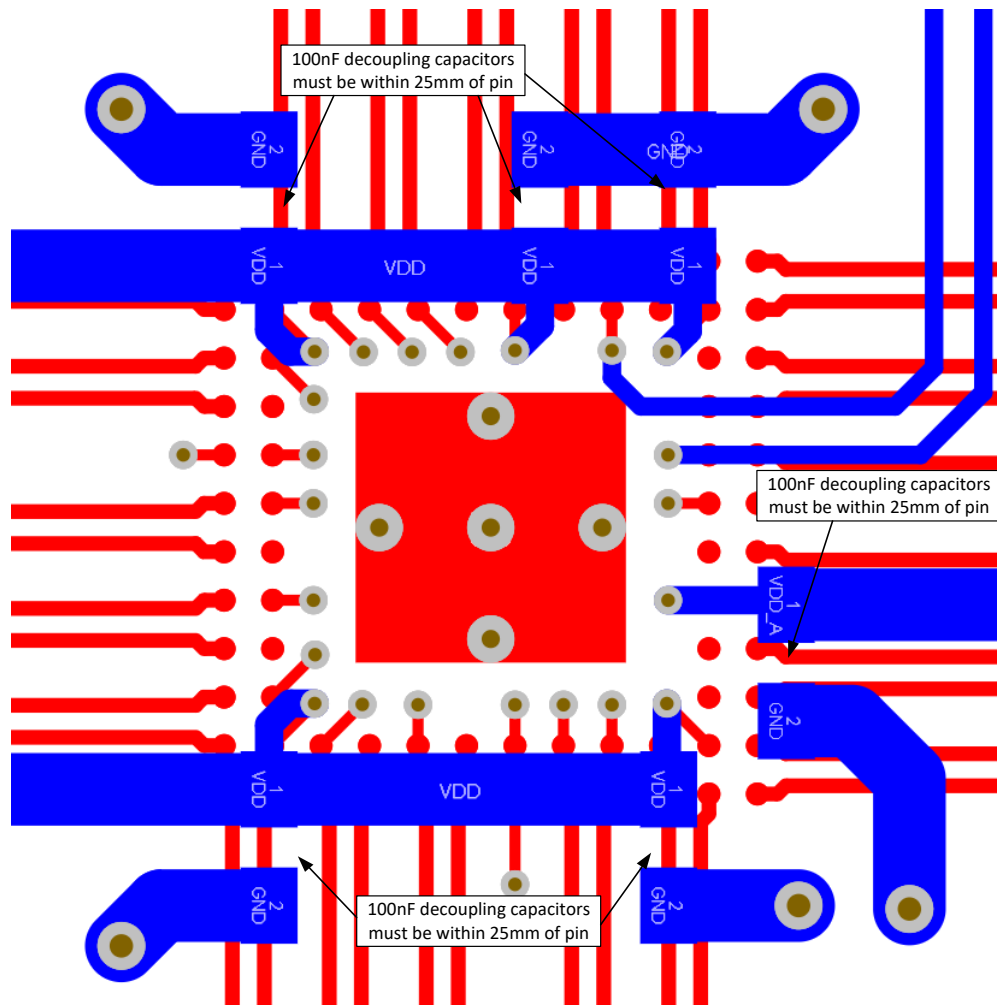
PCB Layout Example for CDCDB2000, Bottom Layer
